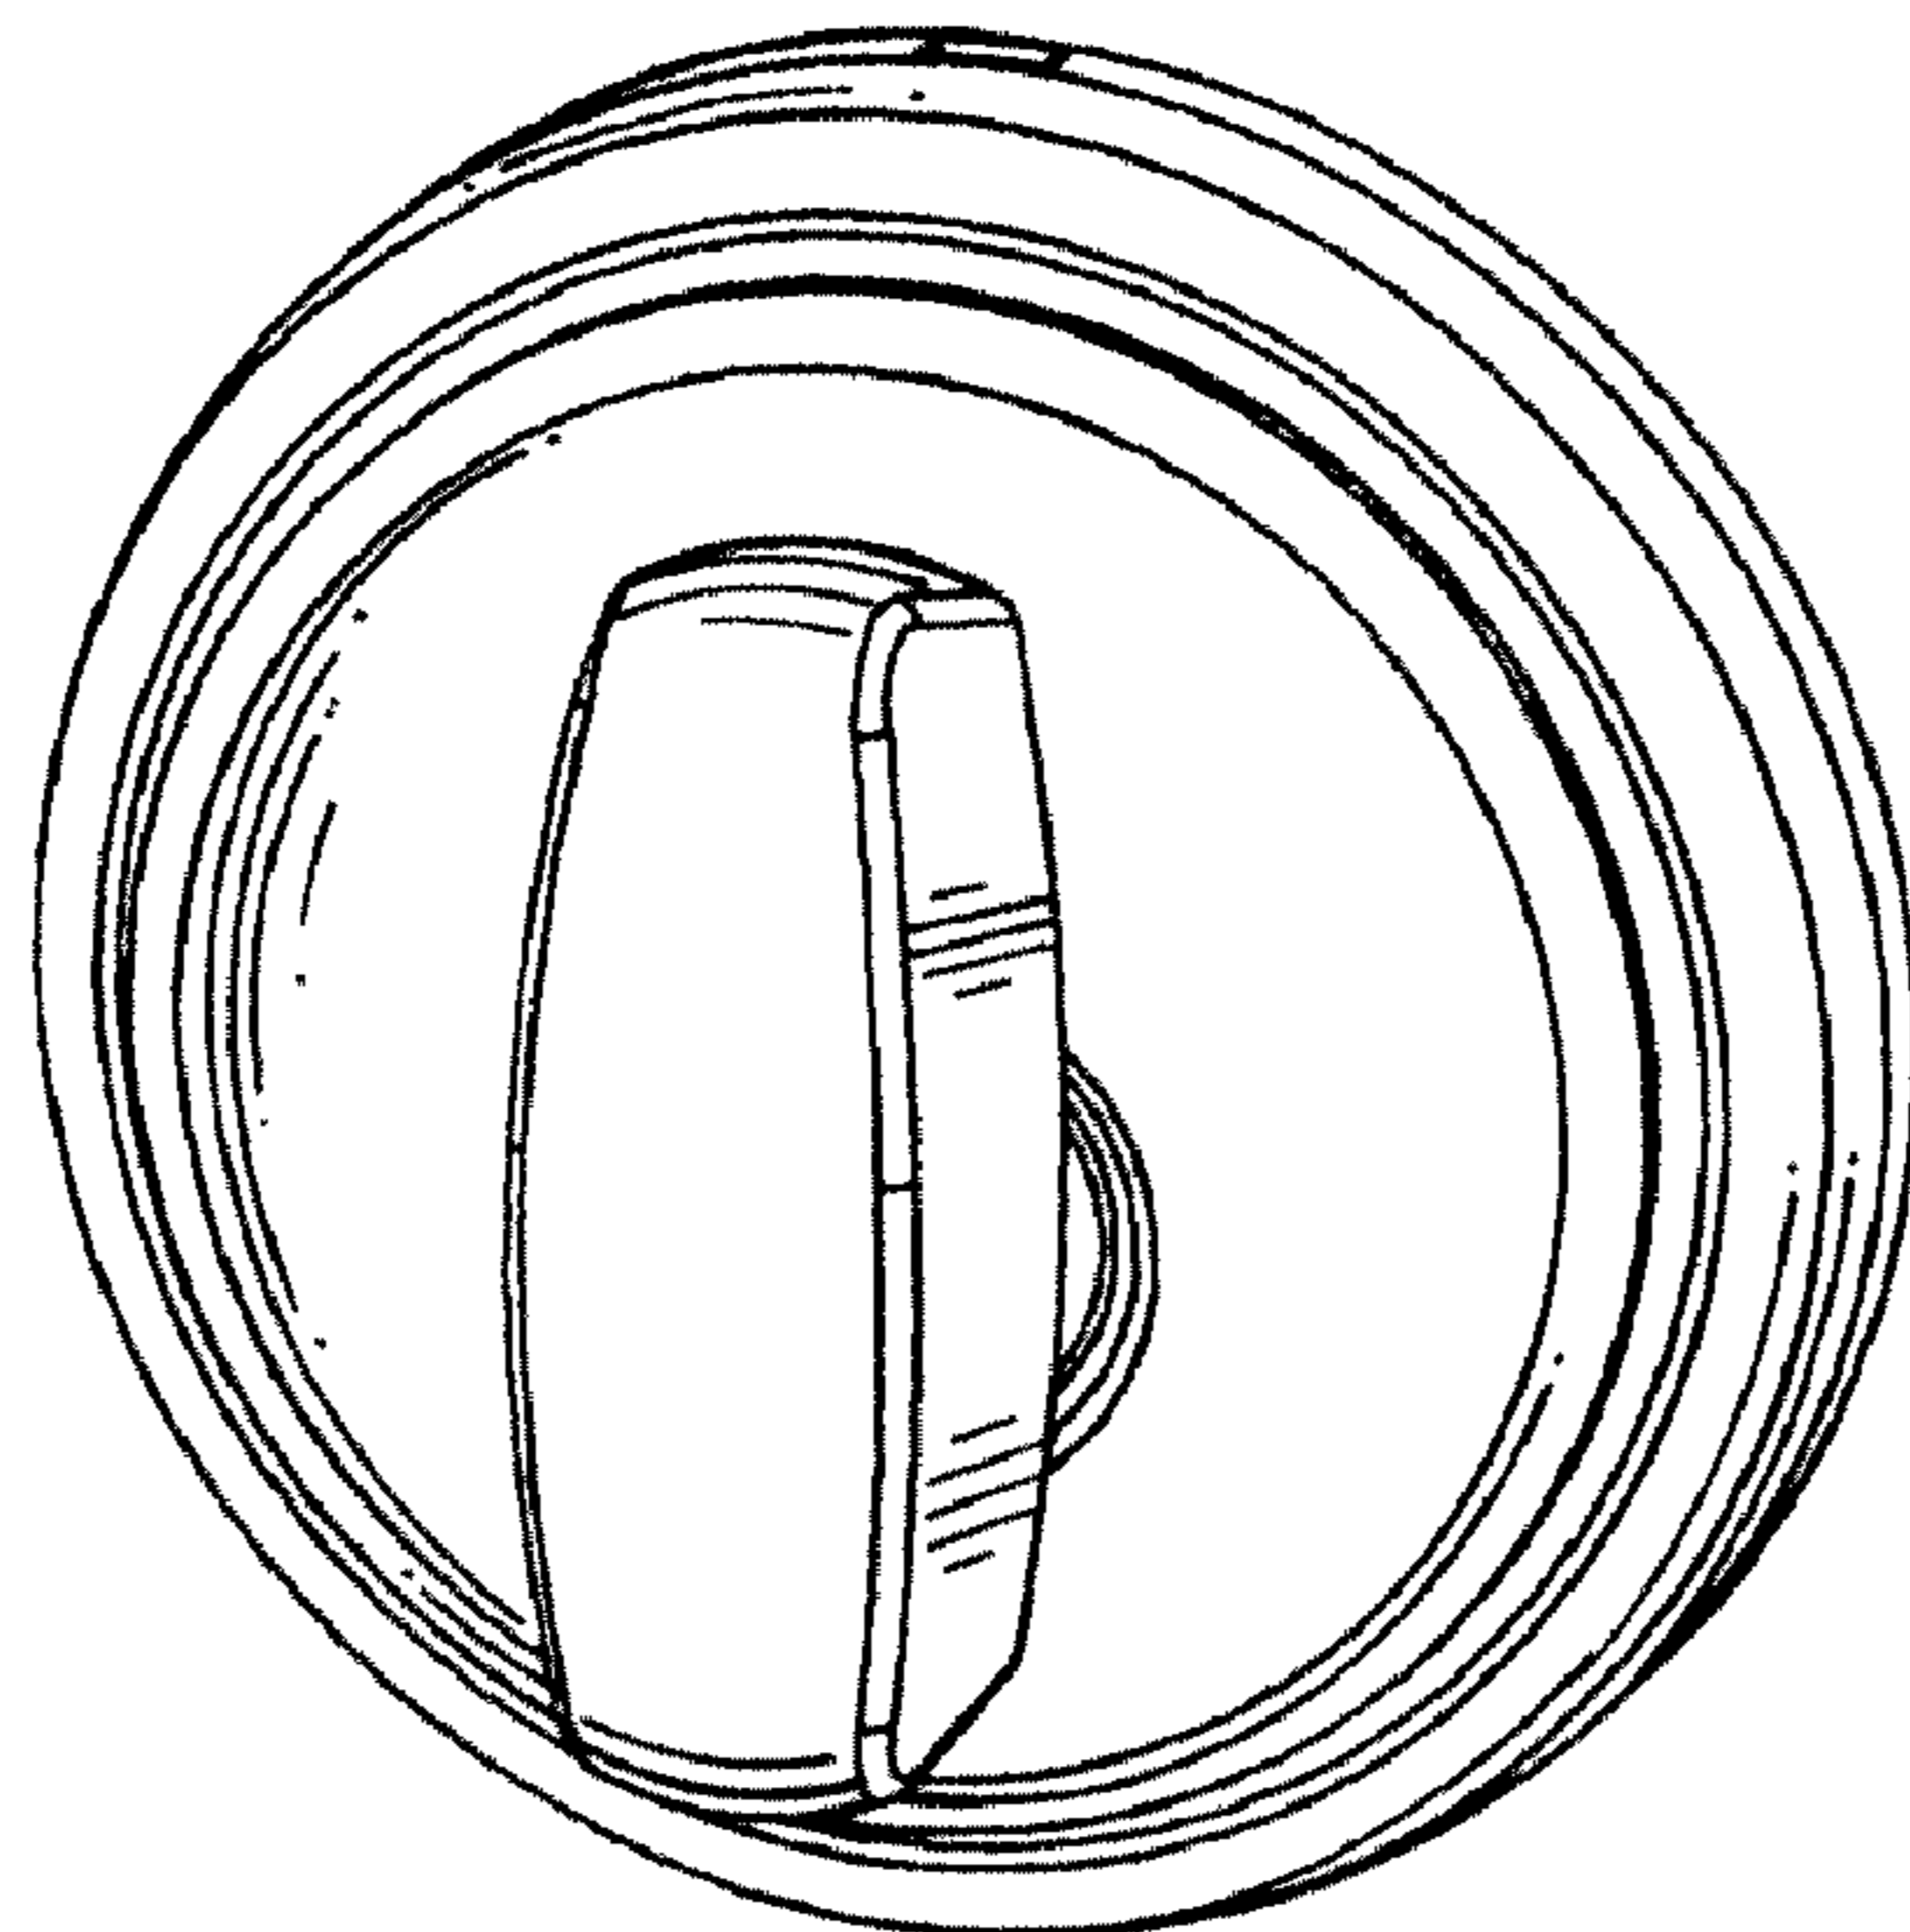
is a bottom plan view of the deadbolt knob assembly shown in FIG. 1;
